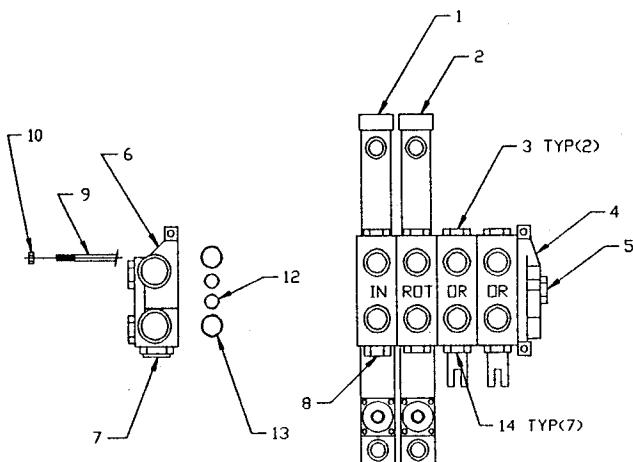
VALVE BANK ASSEMBLY (51706605)
